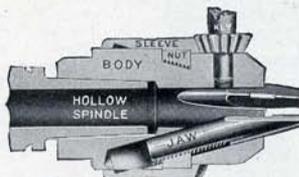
Hollow Spindle Valve Chuck 1/2-in. Capacity Cat. No. 1211. Price....\$9.50
